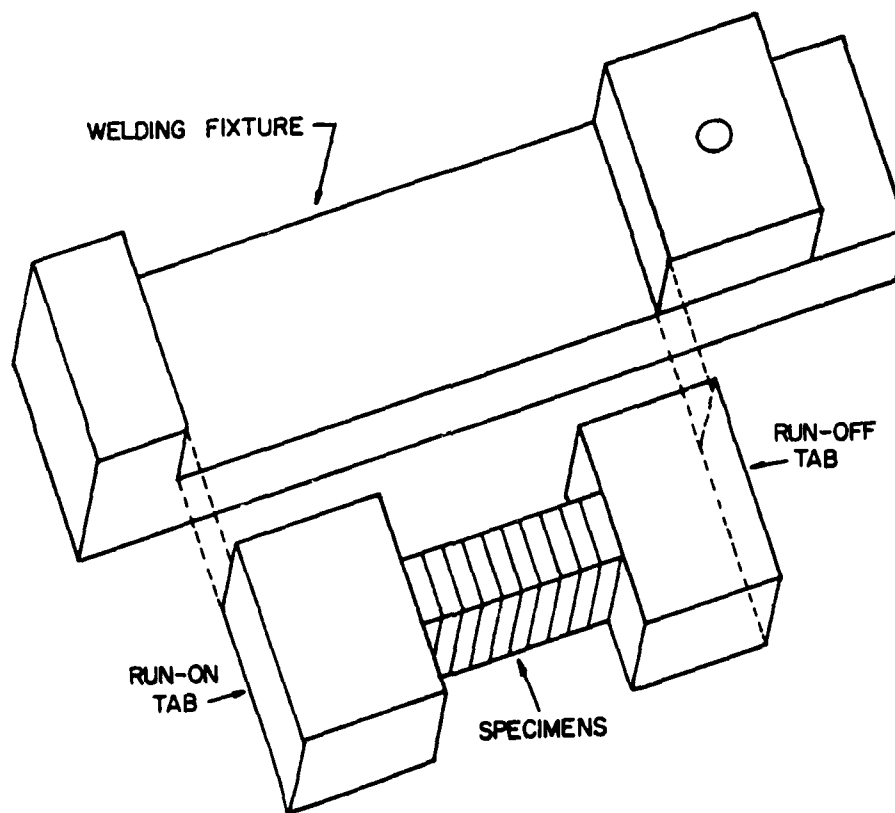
Schematic Illustration of the Welding Fixture and Specimen Arrangement.
